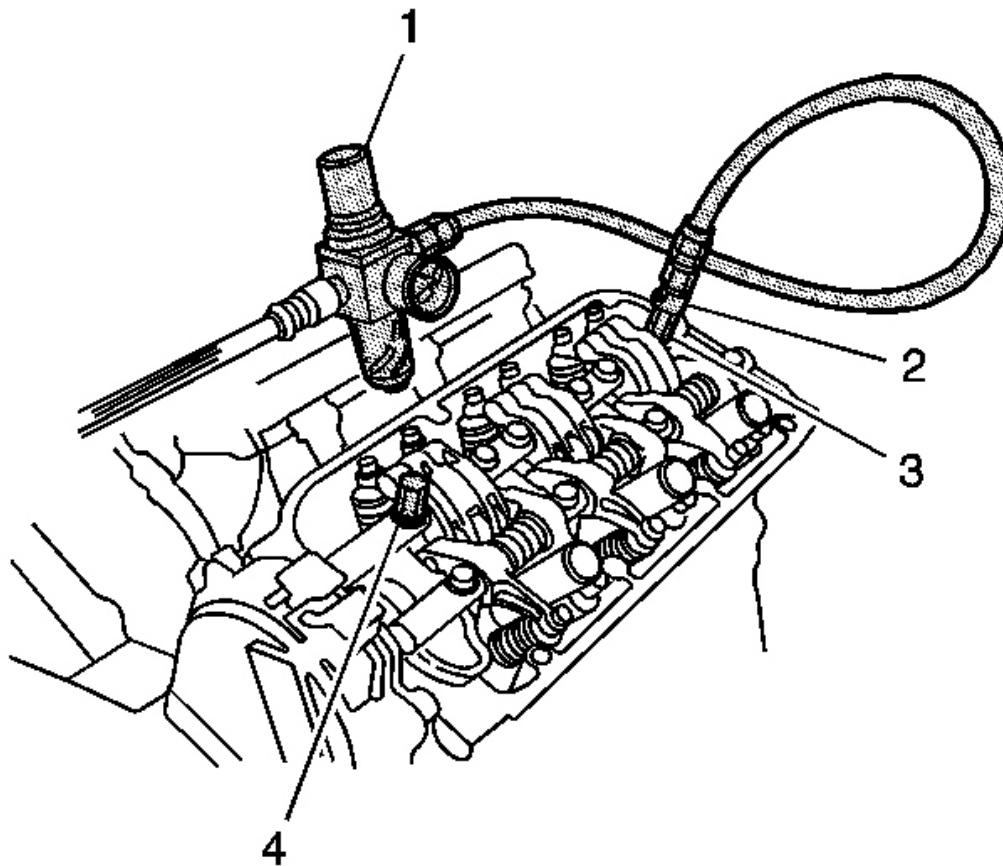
Identifying Intake Rocker Arm Shaft Mounting Bolts
